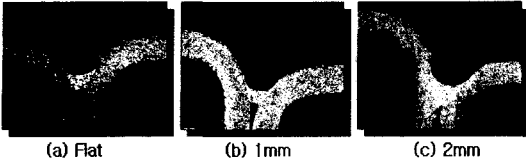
Cross section of kissing weld joints. kissing weld joint
